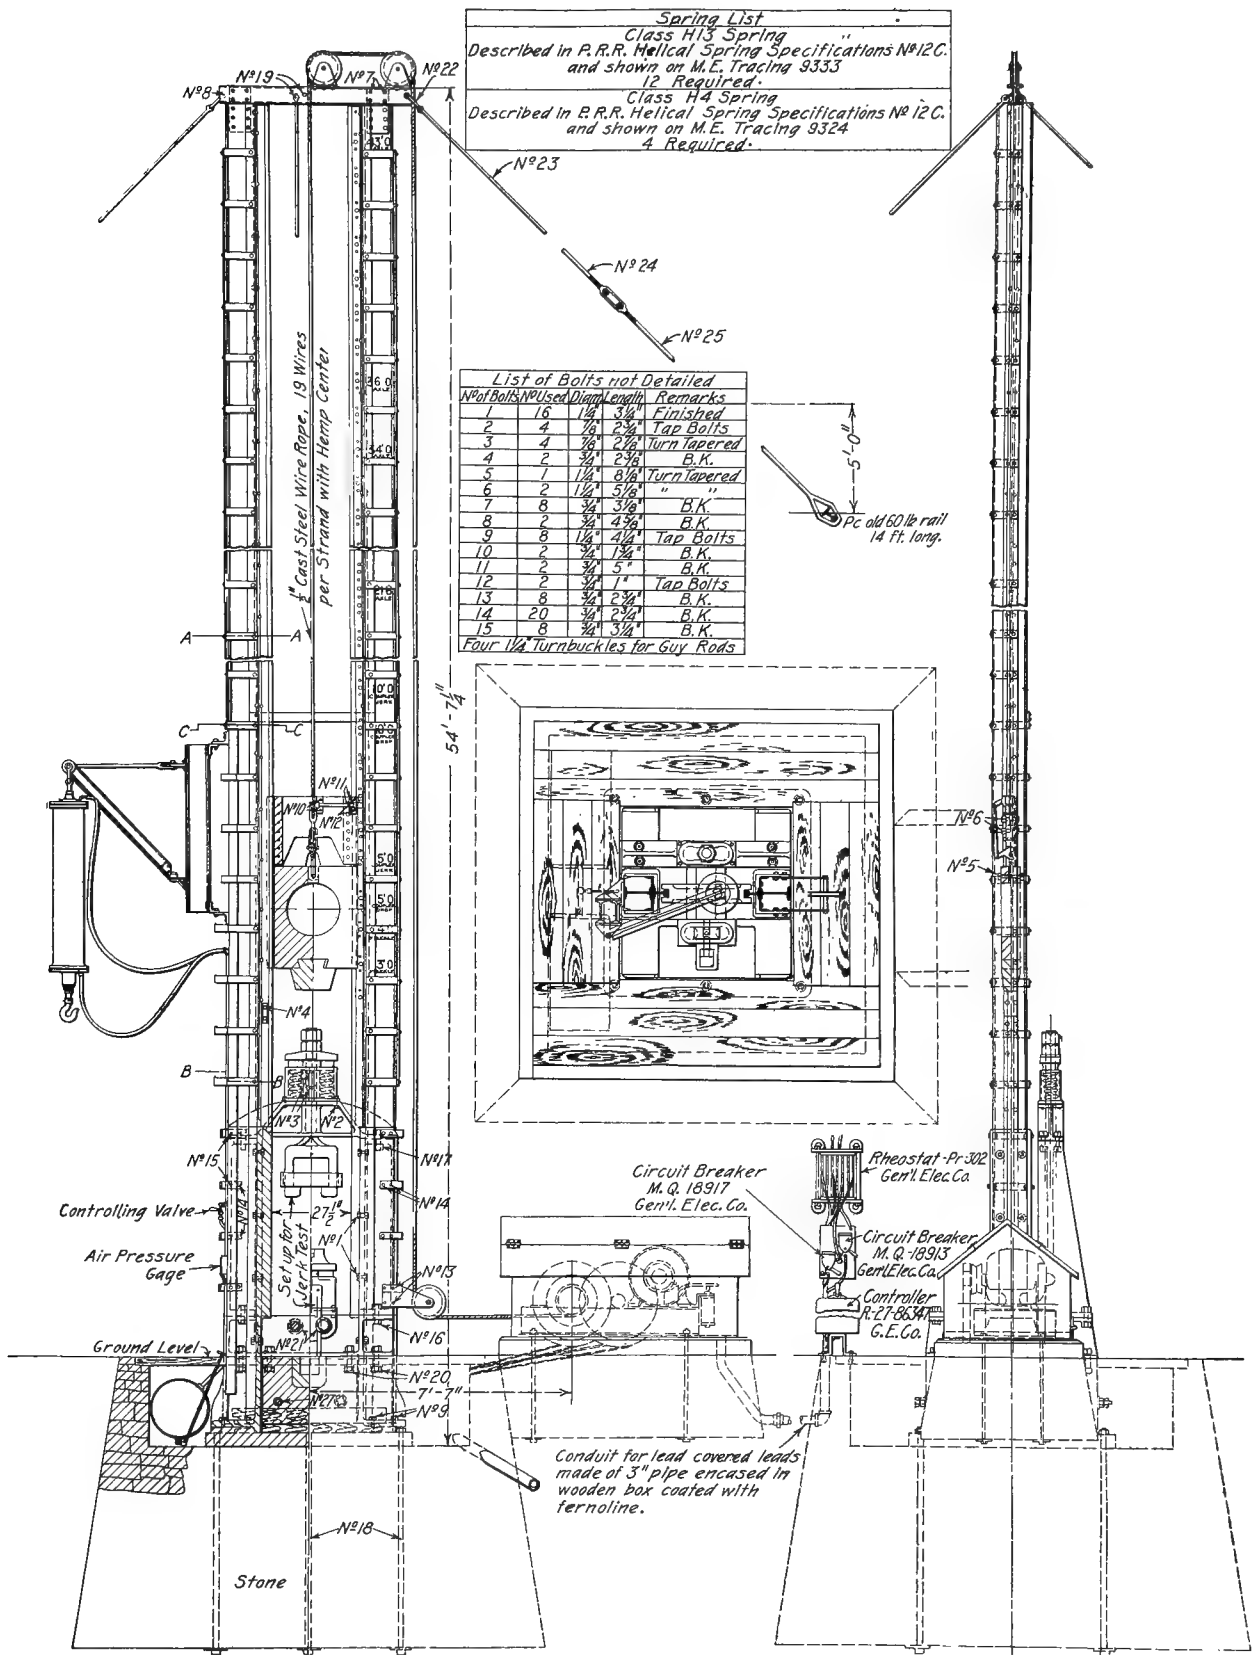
General Arrangement for M. C. B. Standard Drop Test Machine for M. C. B. Couplers and Axles. (M. C. B. Sheet 29.)
